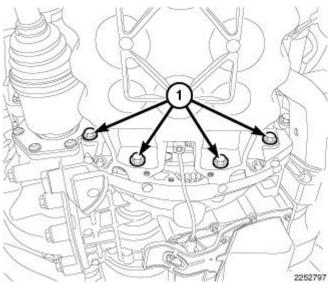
Oil Pan To Transaxle Bolts Courtesy of CHRYSLER LLC
